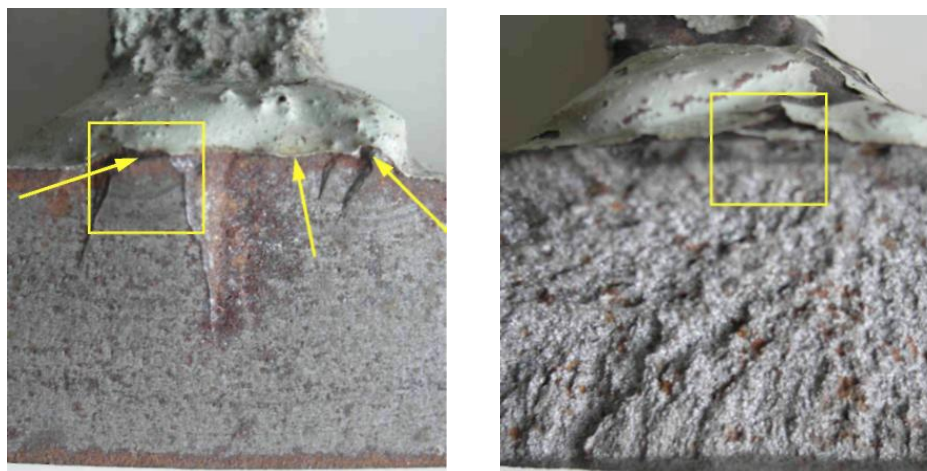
Welded joints between rib and lugs (pos. 68 left, pos. 62 right).
